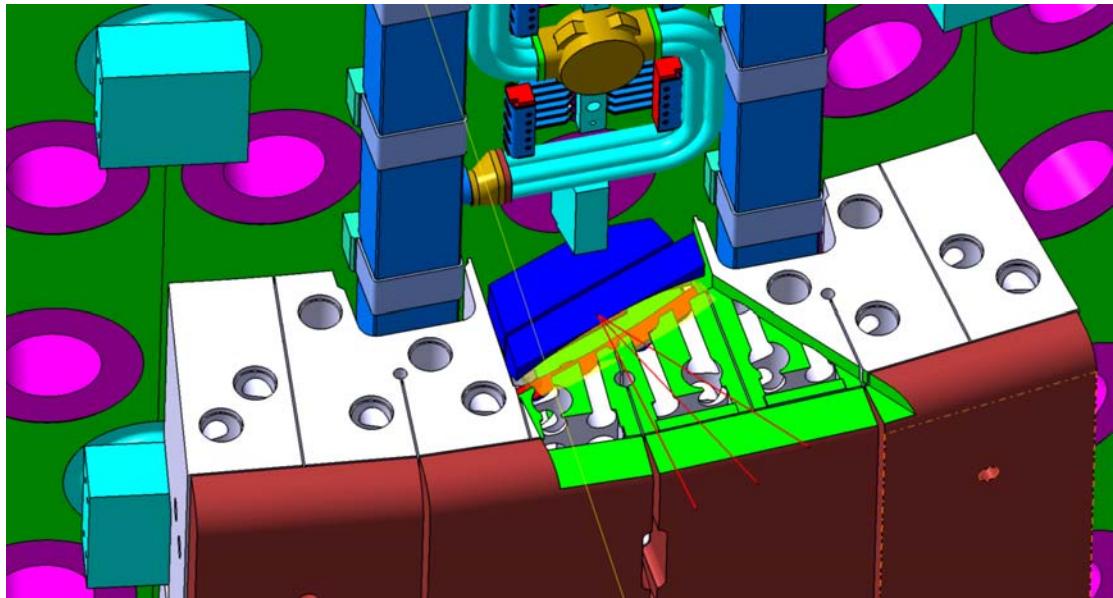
Mirror assembly integrated between blanket and wall of the Tokamak
